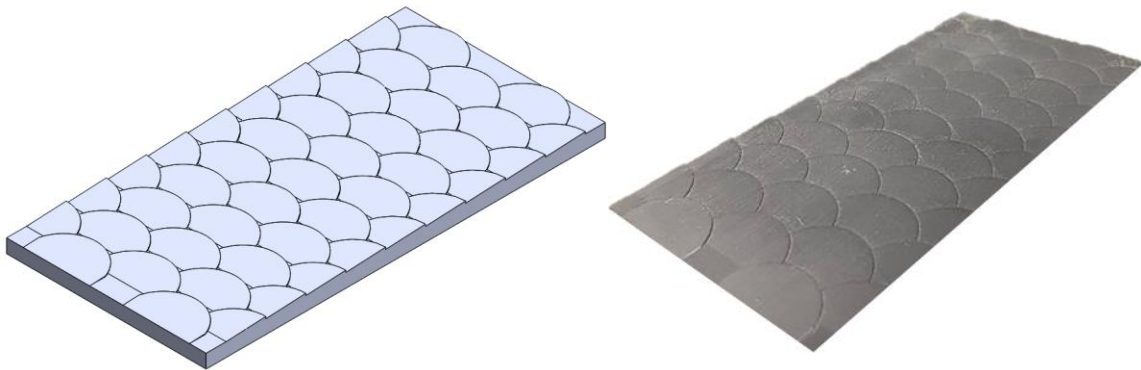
(Left) CAD model of scale array and (Right) photograph of the 3D printed scale array used for testing.
